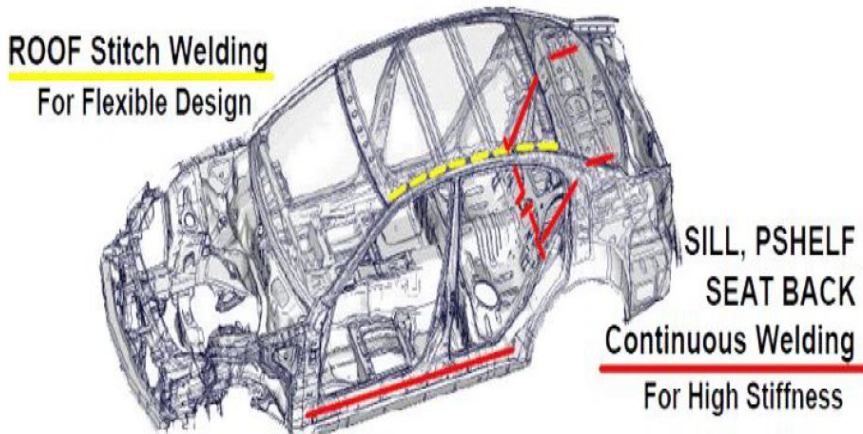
Application LASER welding in Infiniti G35
